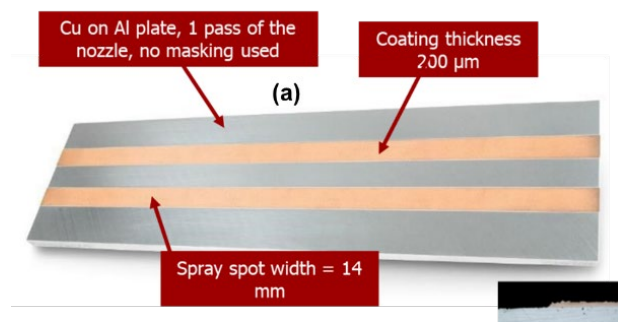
(a) Cold Spray deposited Cu contact tracks on Aluminum
